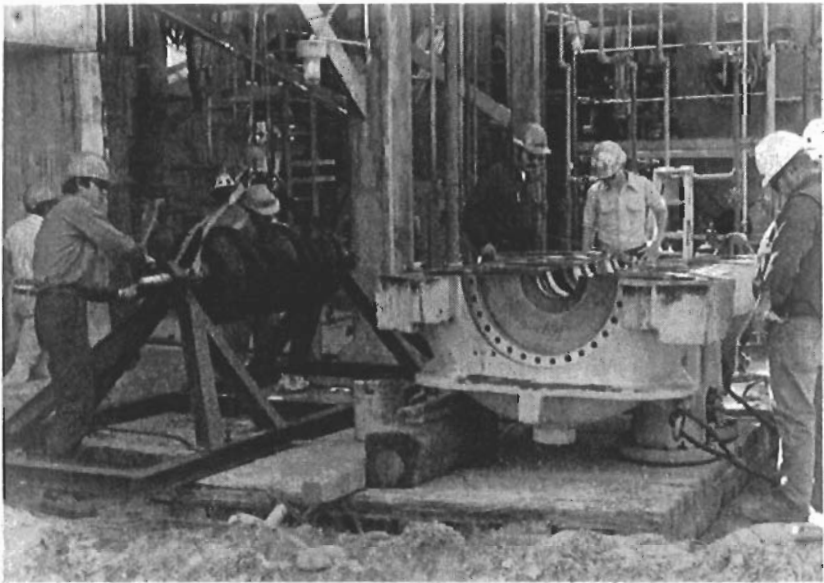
Removing the thrust disc of the Kingsbury assembly, OB end (2½ hours into the job).
